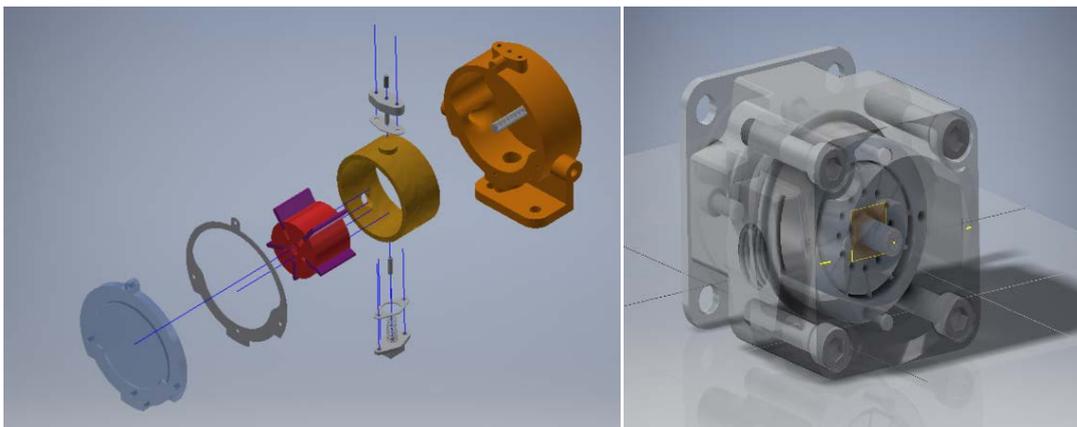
Exploded view of single-acting vane pump and structural view of double-acting vane pump
